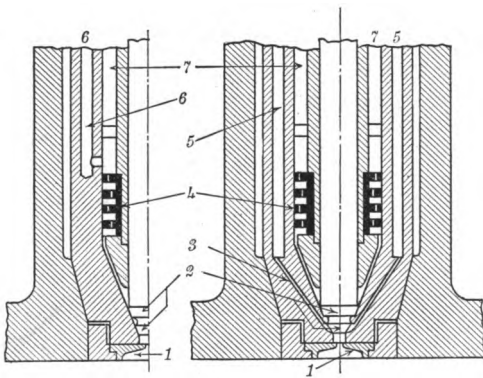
SPRAYER FOR SEPARATE FUEL OILS
